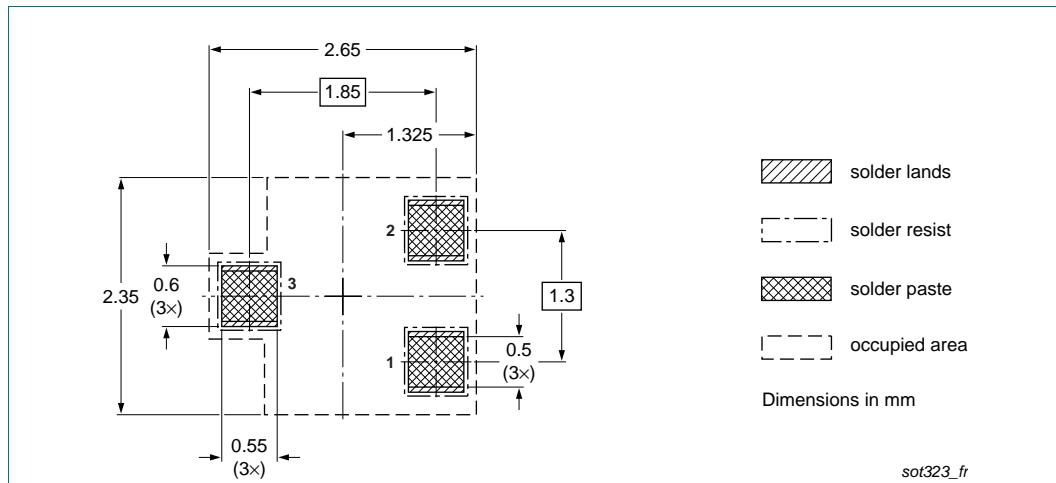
Reflow soldering footprint PDTC123JU (SOT323/SC-70)
